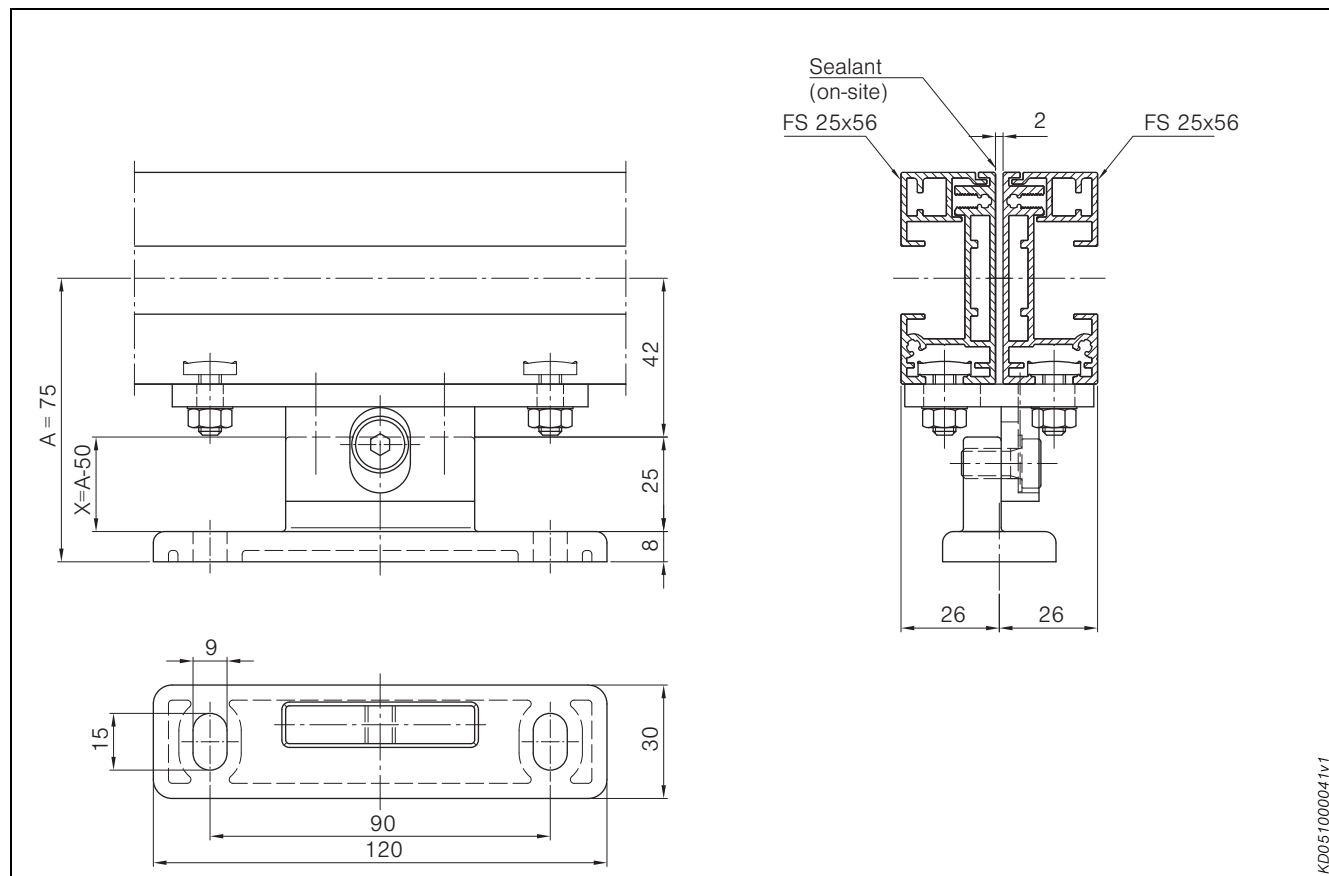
Guide rail bracket no. 9 – mounting two guide rails on one bracket
